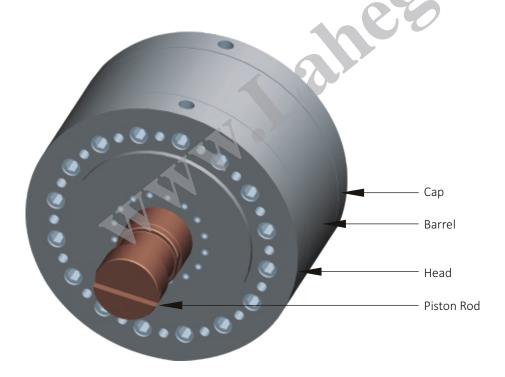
Hydraulic Rotary Cylinder Bore ø 600mm x Piston Rod ø 560mm x Stroke 65mm.
